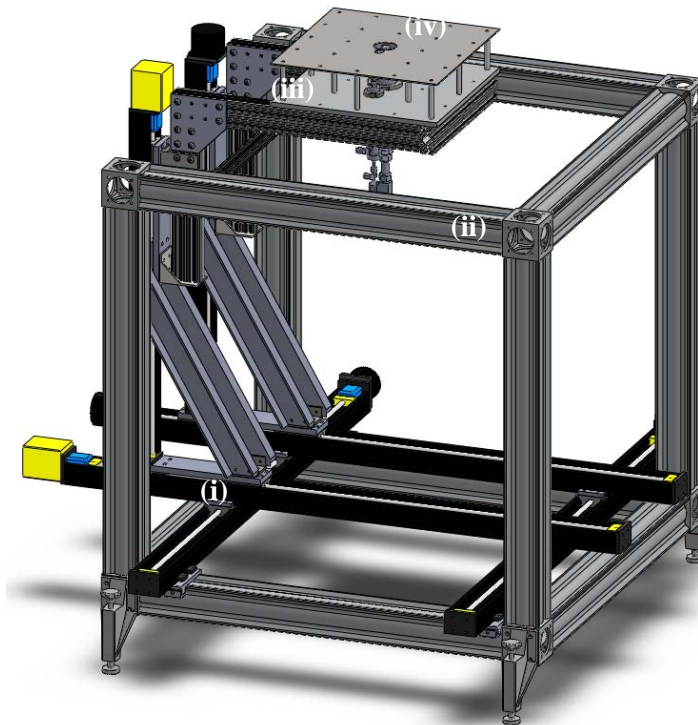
Layout of the three-dimensional traverse and supporting structure; (i) traverse components, (ii) optical railing for supporting the PDI transmitter and receiver, (iii) burner assembly support structure, and (iv) burner assembly.
